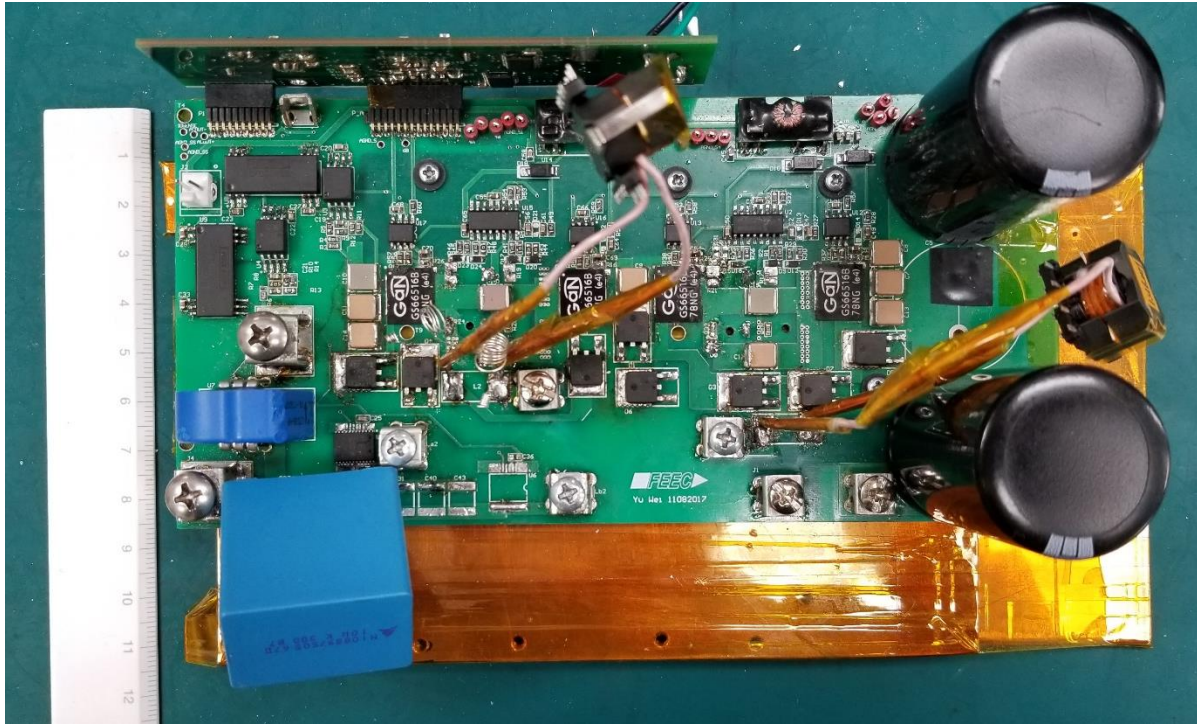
Proposed Inverter assembled PCB for Testing.
